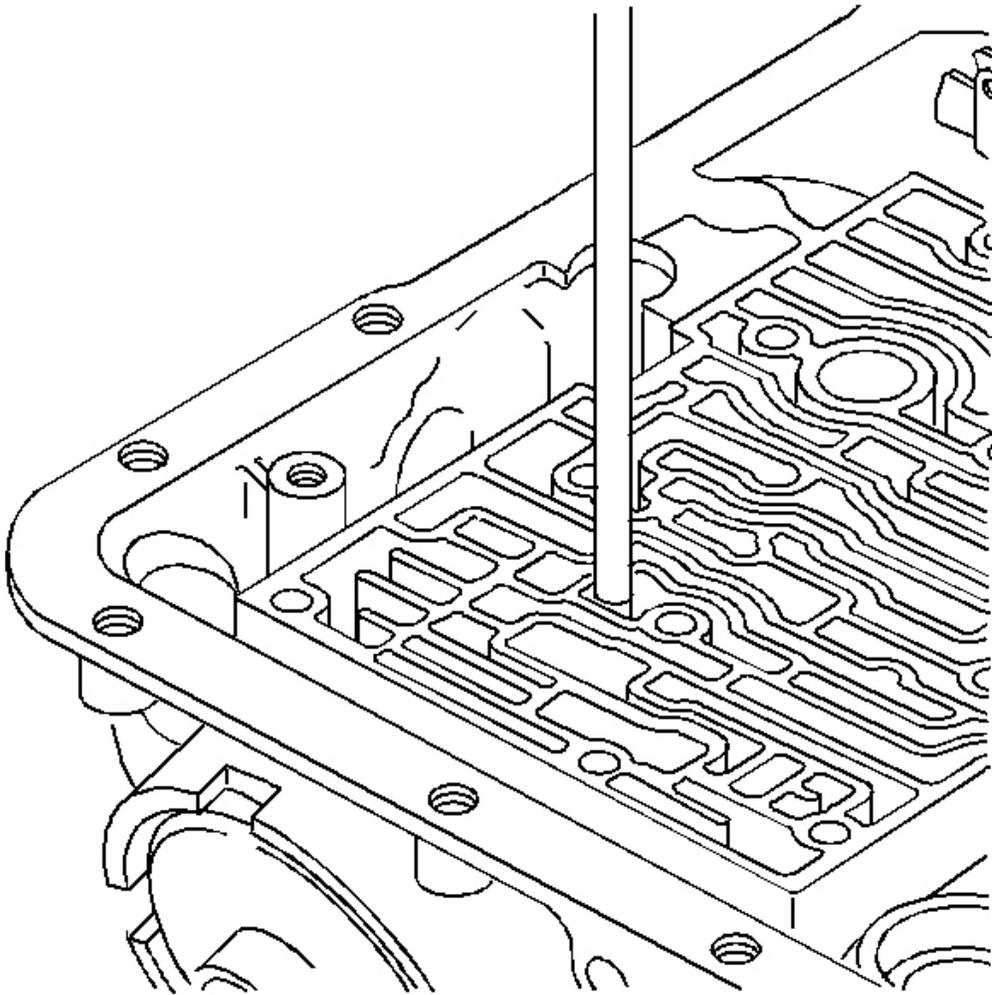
Third Accumulator Retainer, Ball Assembly & Scribe Mark
